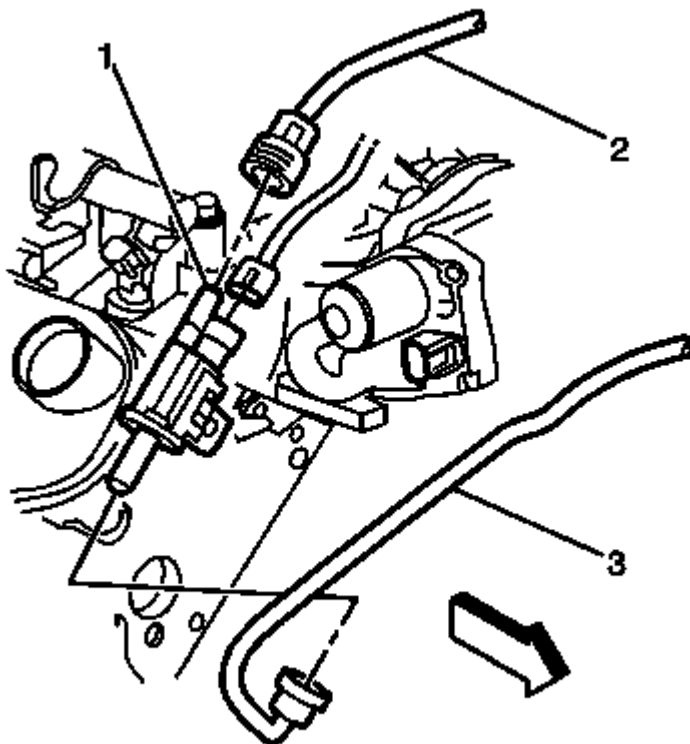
Locating Fuel Tank Hose, EVAP Purge Valve & Hose
